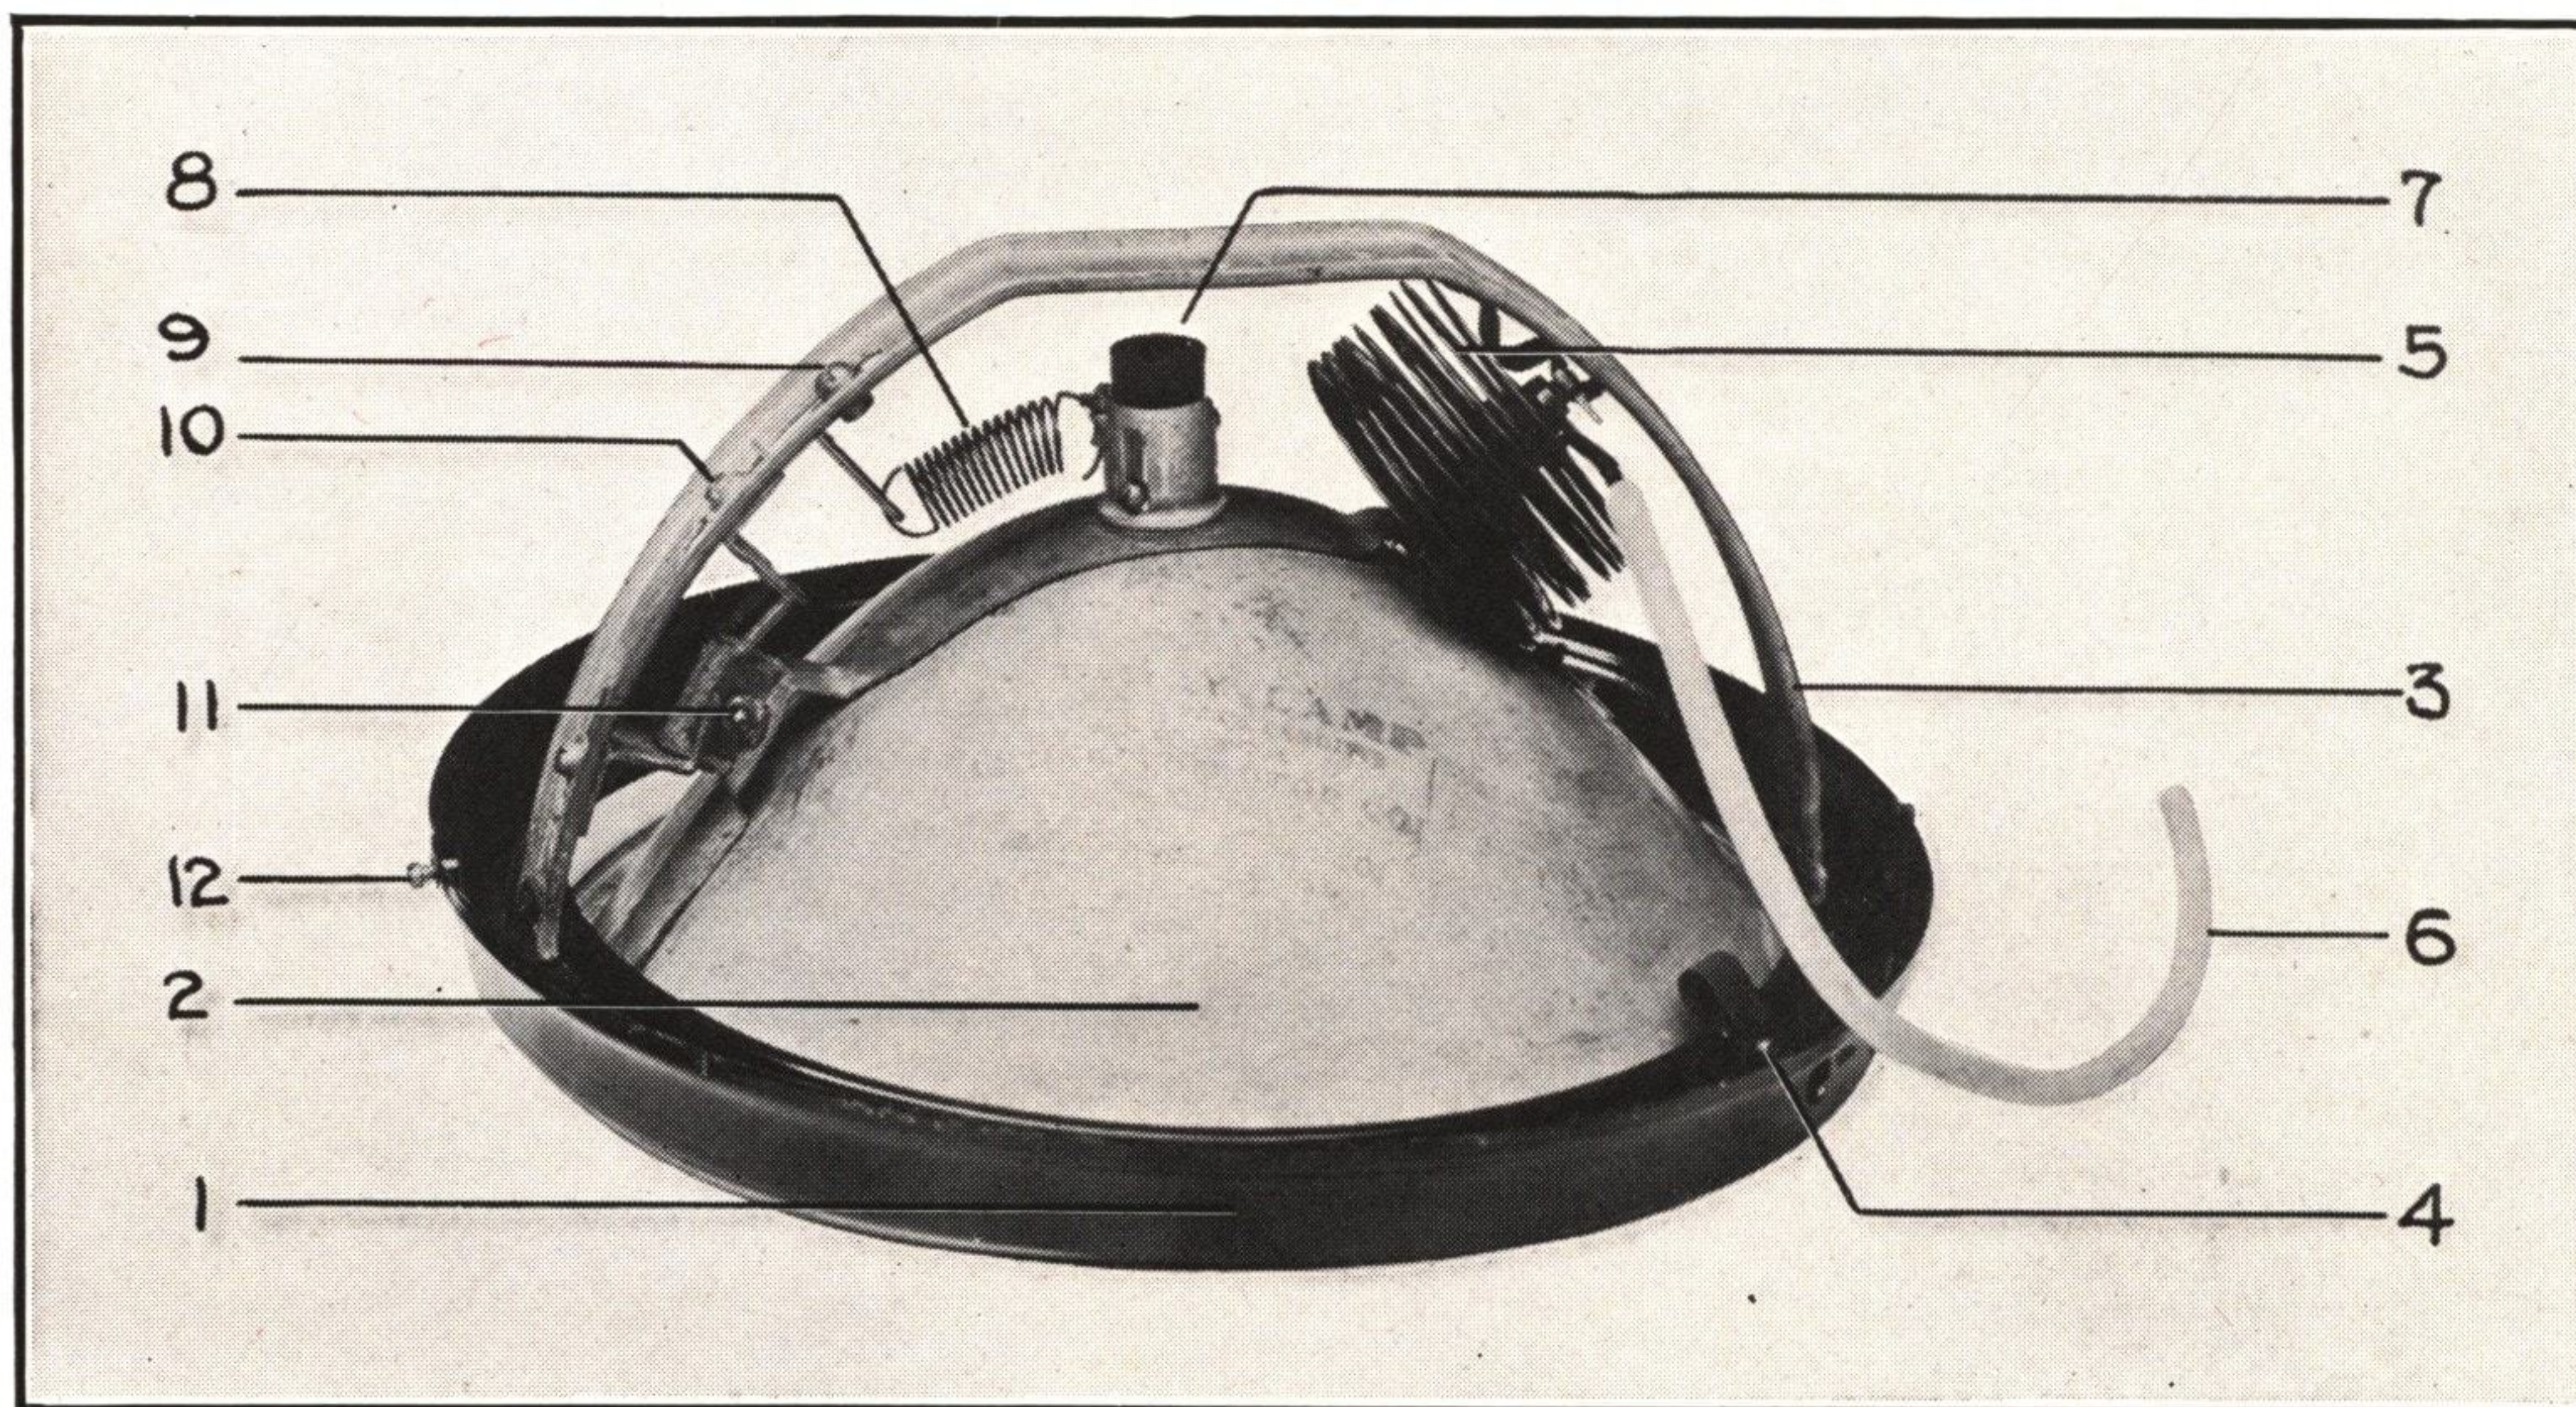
Construction of 2-Way Head Lamp Tilting Mechanism.
